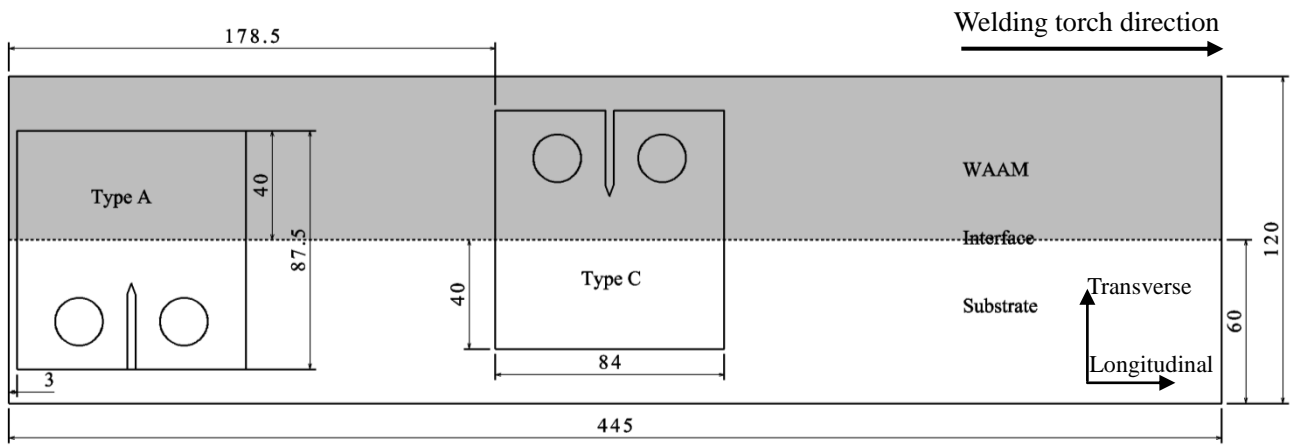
Layout of two types of test specimen on a WAAM-substrate wall (unit: mm)
